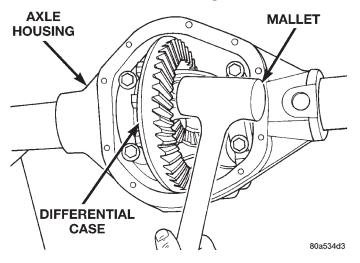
Seat Ring Gear Side Differential Dummy Side Bearing
